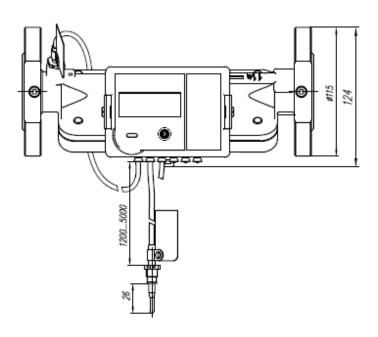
Flow sensor q_p = 0.6; 1.0; 1.5; 2.5 m³/h DN20 flanged connection installation length L = 190 mm
